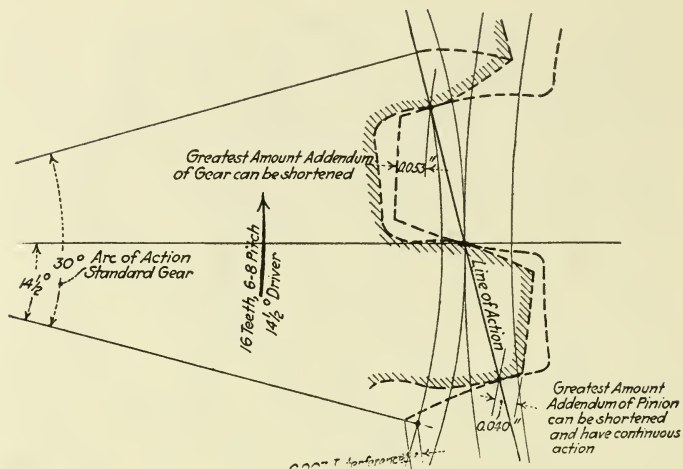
PRELIMINARY LAYOUT THAT IS MADE TO DETERMINE THE LENGTH OF TOOTH NECESSARY TO GIVE A COMPLETE ARC OF CONTACT
